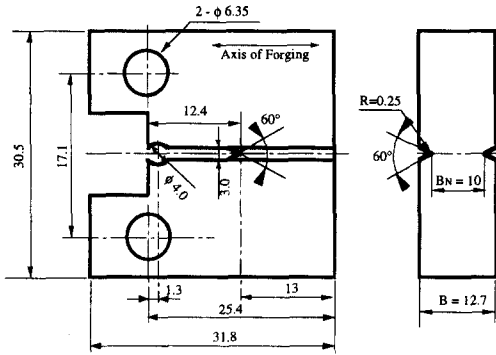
Configuration and dimension of 0.5T-CT specimen used for fracture toughness test.
